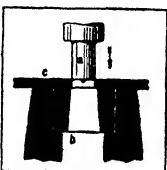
PUNCHING (a) PUNCH. (b) BOLT. (c) PLATE BEING PUNCHED
